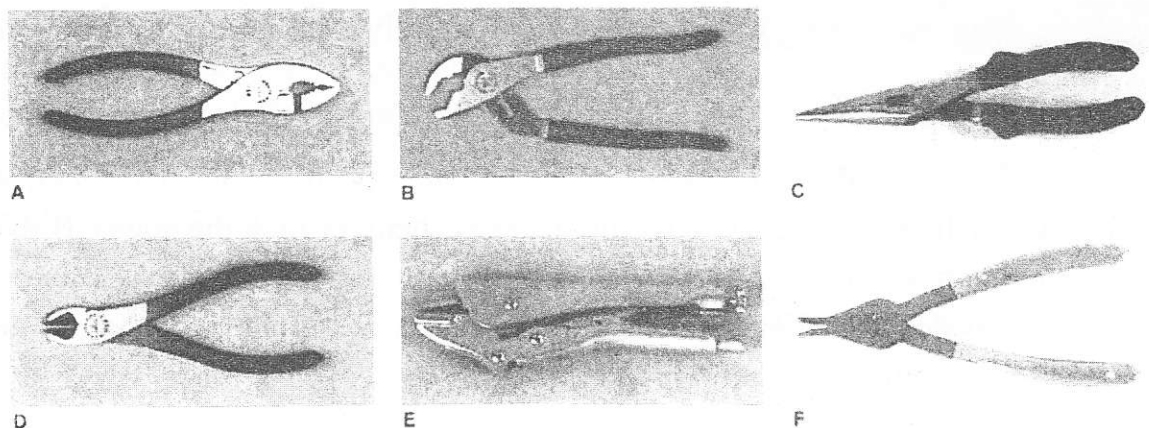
Types of pliers. A – Slip joint; B – Rib joint; C – Needle –nose; D – Diagonal cutting; E – Vise grips; F – Snap ring
